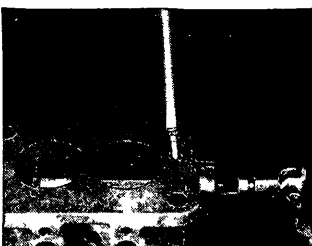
Remove throttle centering screw, then throttle shaft and lever. Check shaft for wear, loosen lever, and
